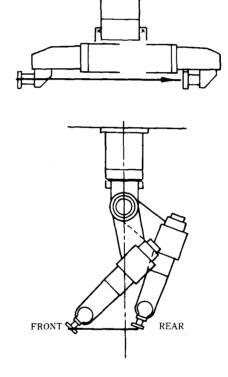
4 Alarm for Passing Manipulator to S-axis Center Line
